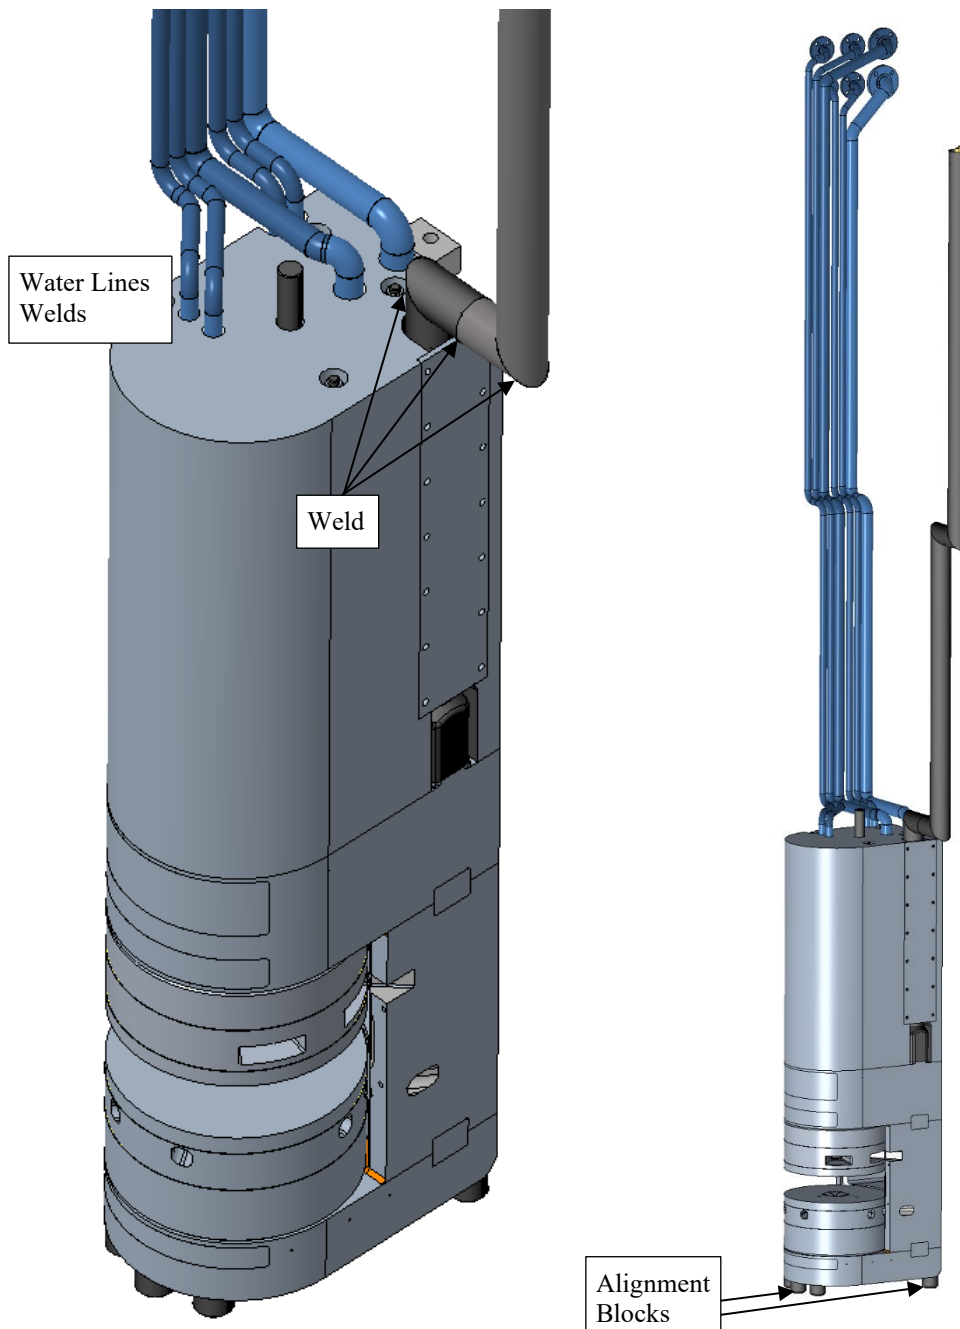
Piping welds above the shield block and overall MRA view.
